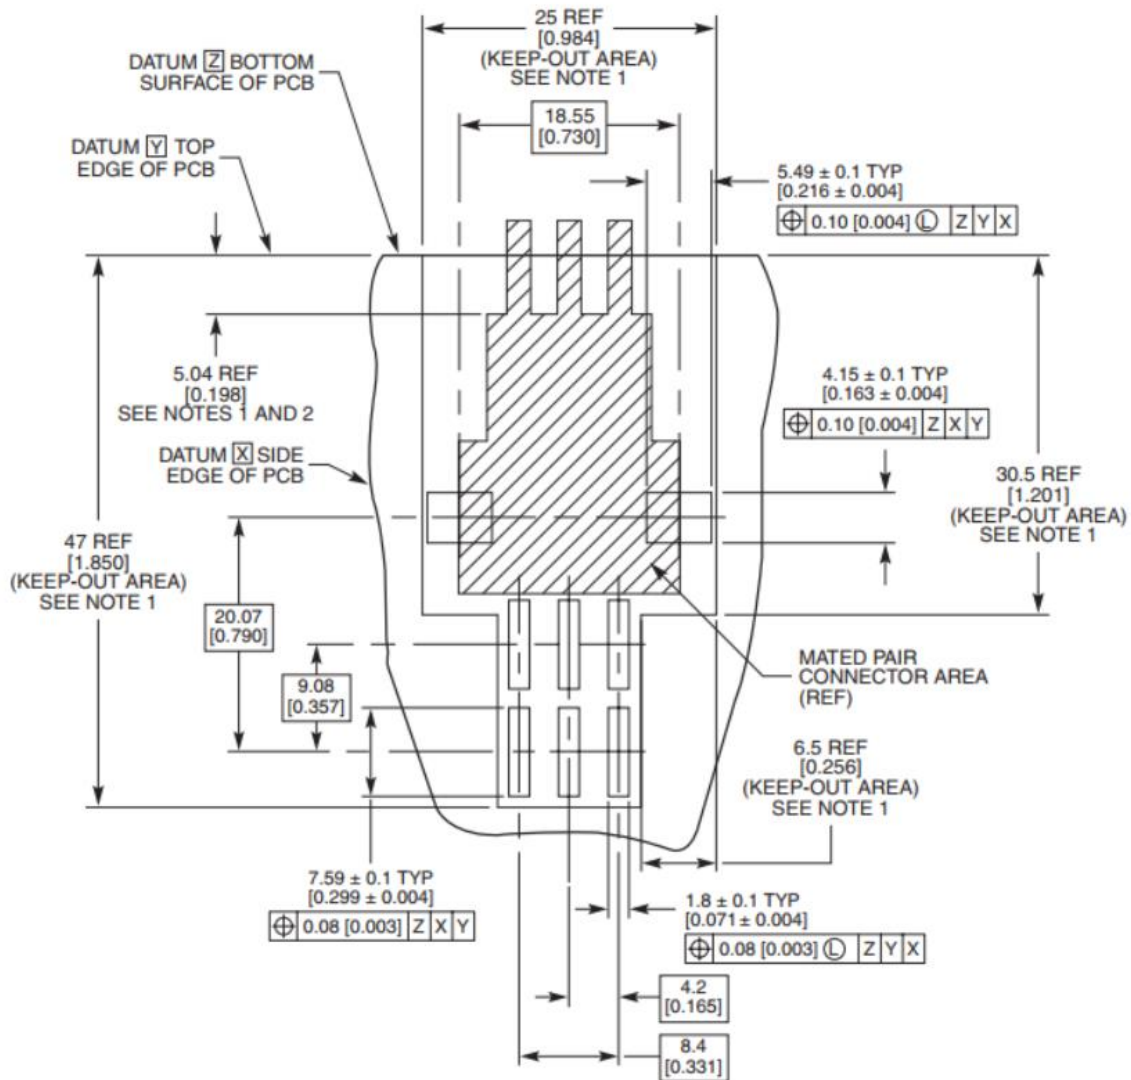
2x3 Right Angle Through-hole Header Recommended PCB Footprint
